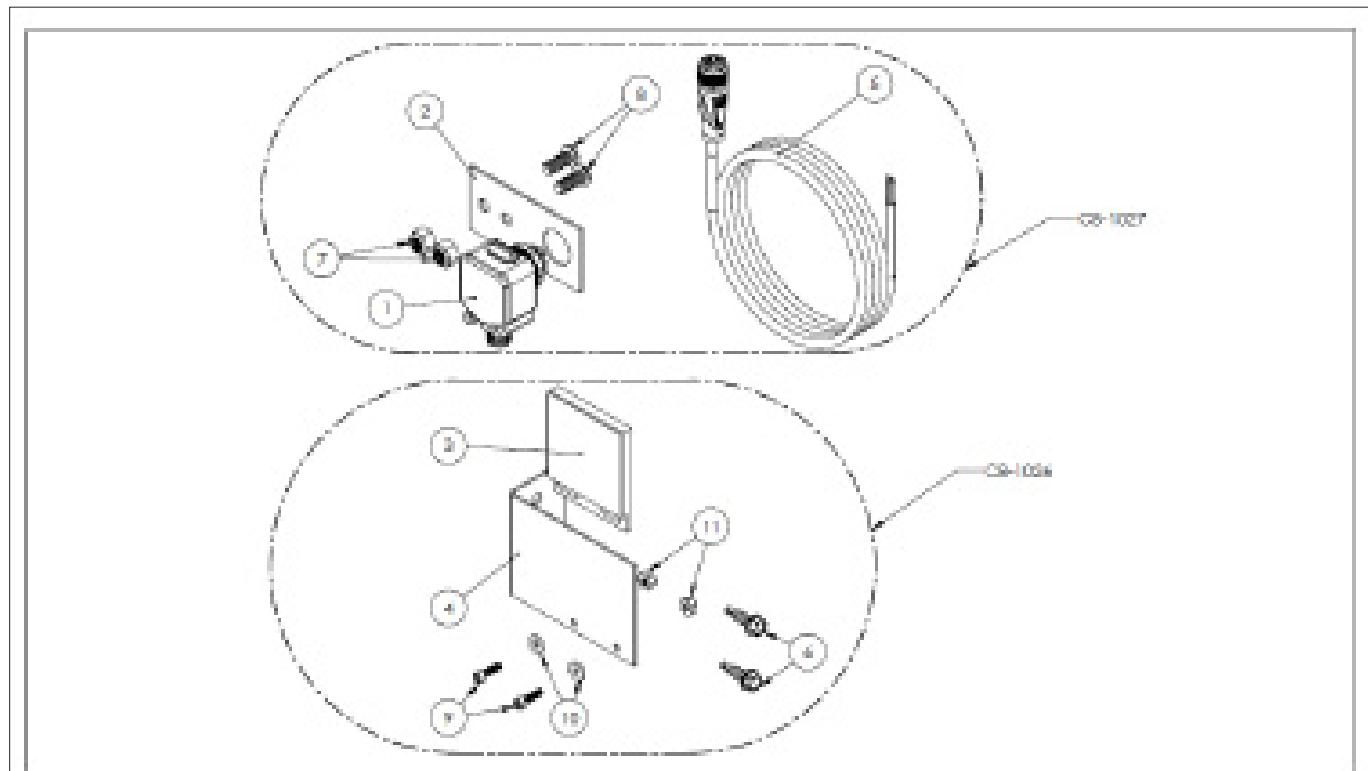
OVERHEAD DOOR SENSOR KIT PARTS CB-1034 (1) SENSOR DOOR KIT
